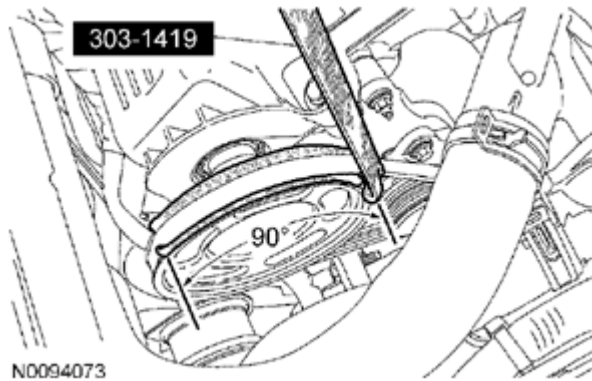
Turning Crankshaft Clockwise And Feed Stretchy Belt Remover Evenly On Camshaft Coolant Pump Pulley
